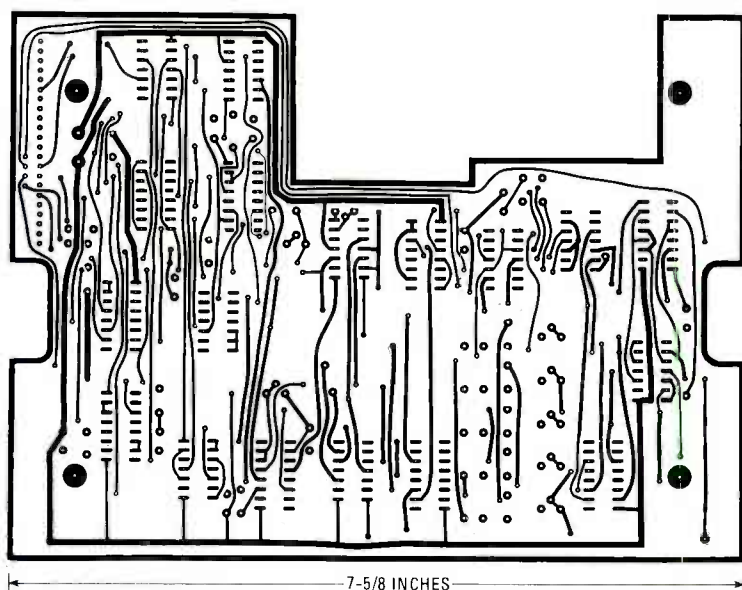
THE BOARD B solder-side foil pattern is shown here, also reduced 50 percent.
